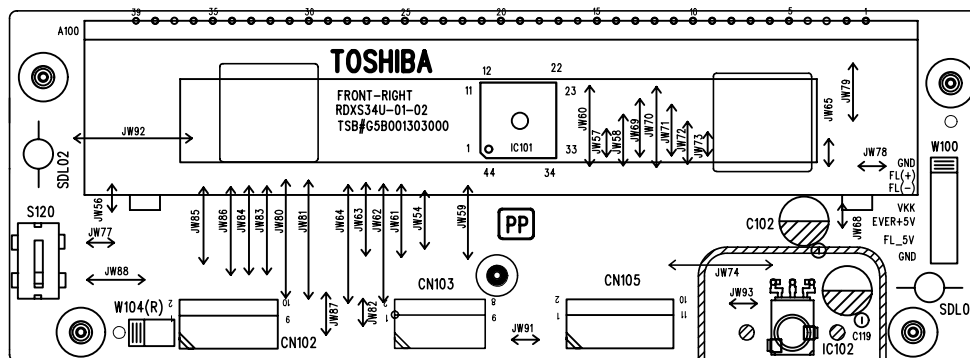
EU03A Front (R) PC Broad (Top side)
